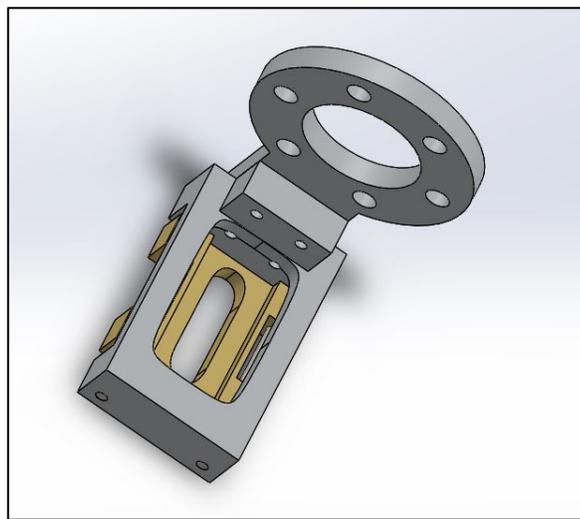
Solidworks CAD drawing of sledge design #1.
